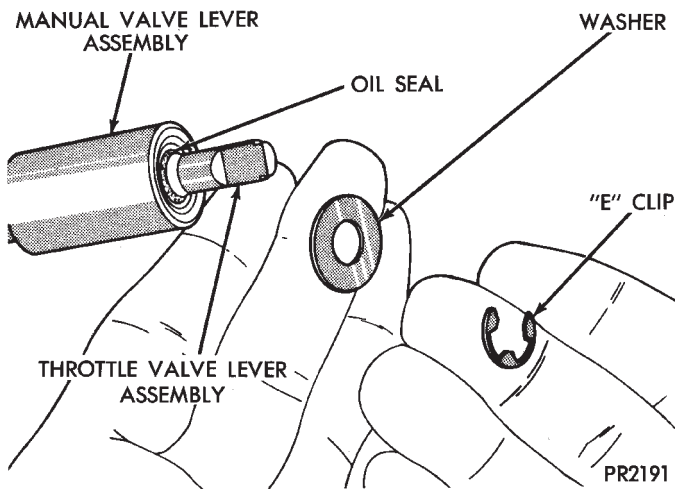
Throttle Shaft E-Clip, Washer, and Seal
